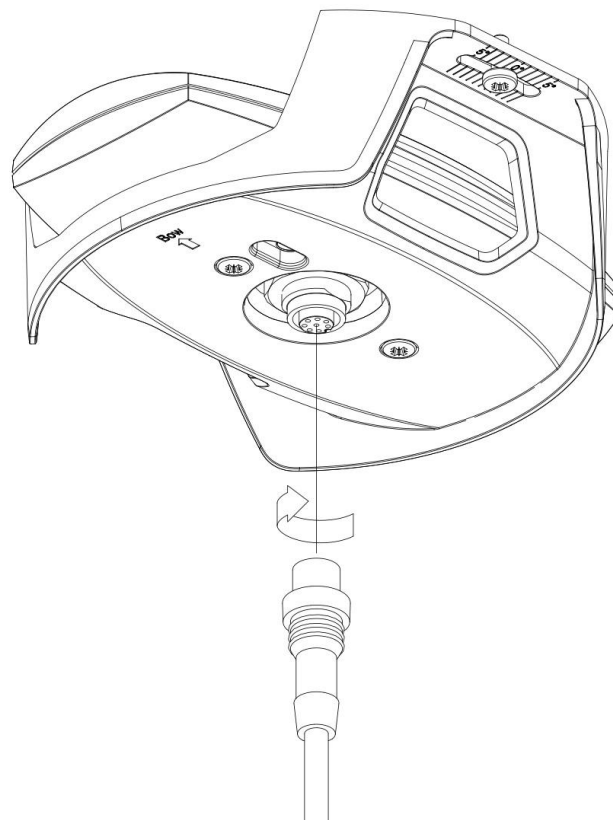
ROOF MOUNT INSTALLATION STEP 8 (CONNECT THE COMMUNICATION CABLE)
